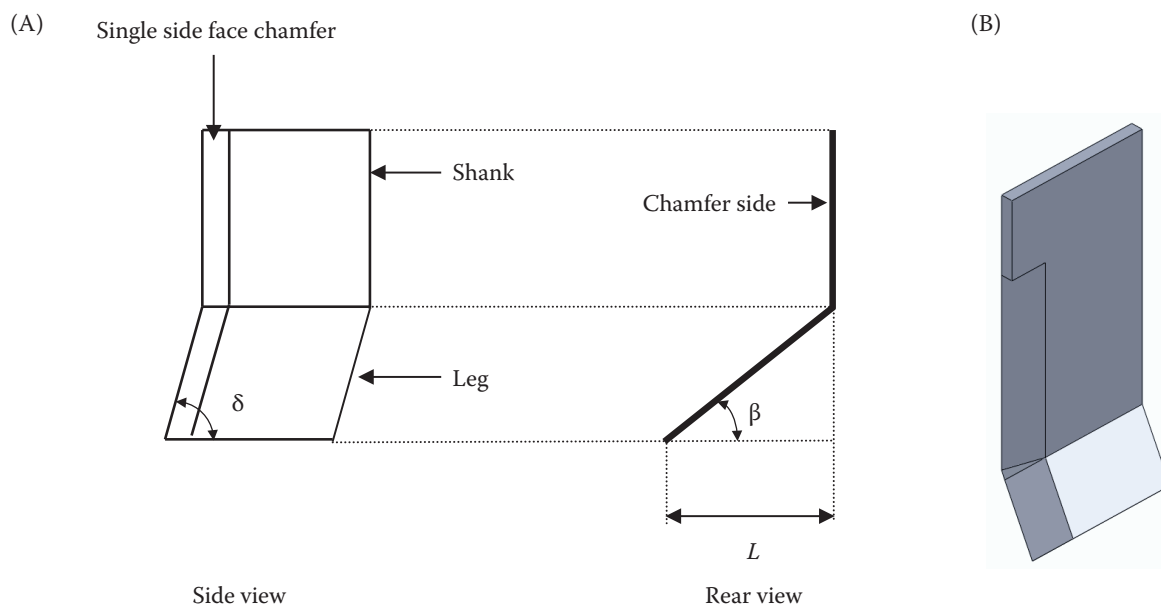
Bent leg blade: (A) geometry and (B) isometric view
